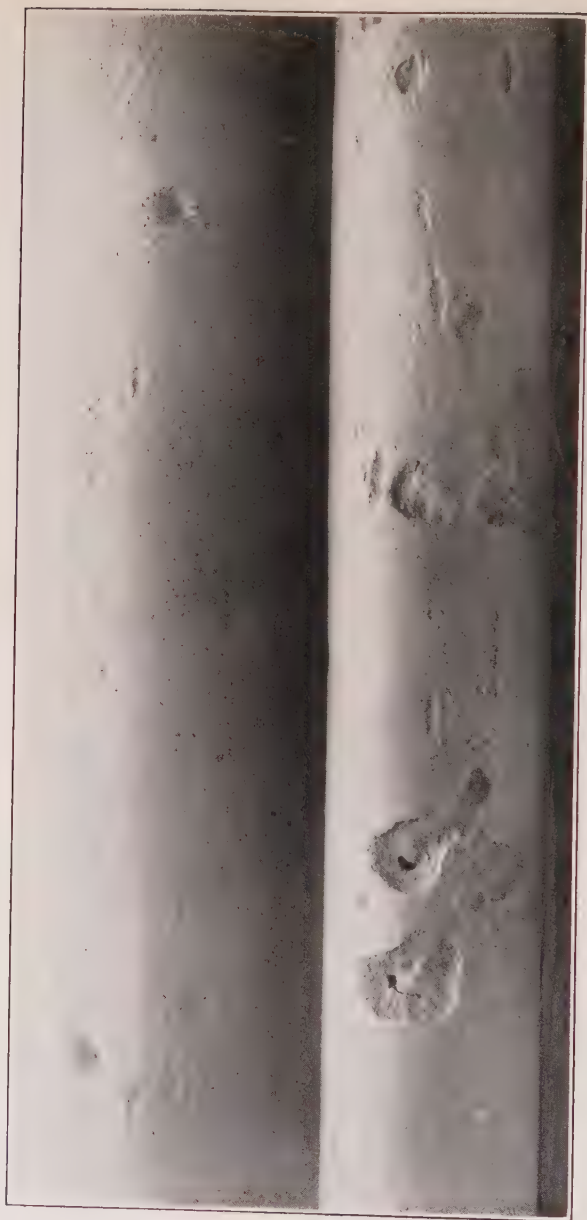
TYPICAL PITTINGS ON BOILER TUBES.
